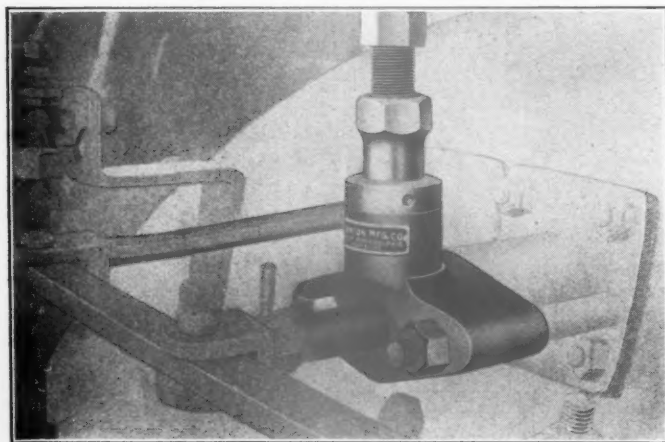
Throttle Rod Stuffing Box in Position on Boiler Head
